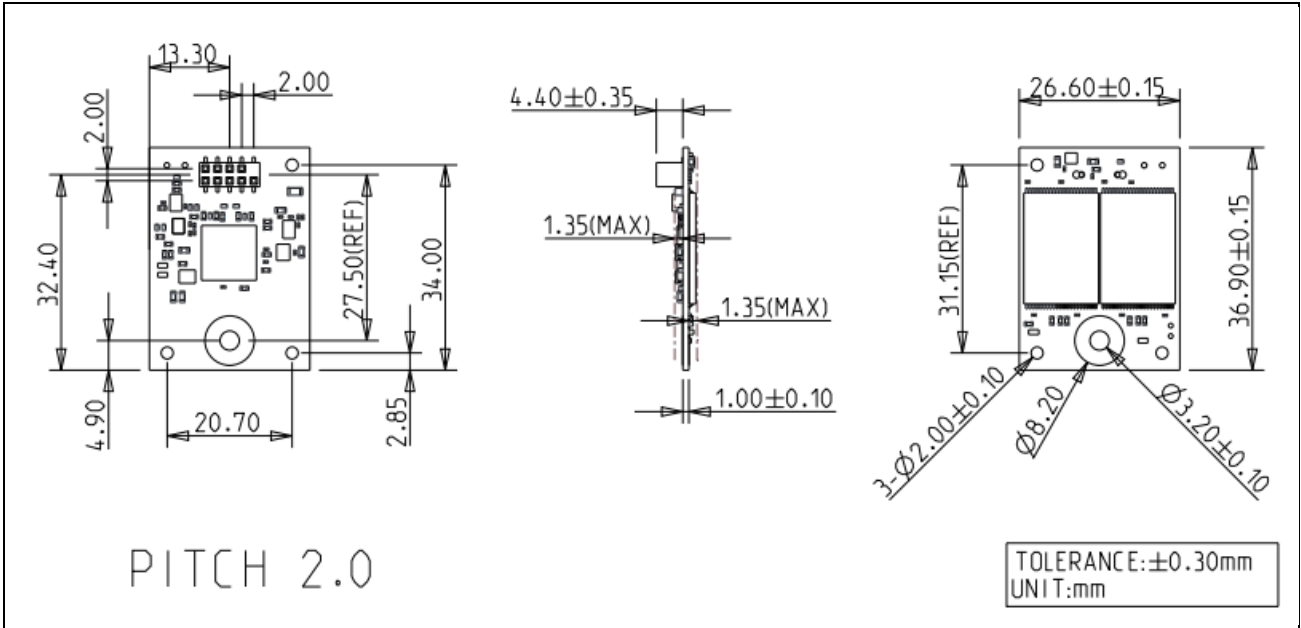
USB EDC Horizontal 2SE2 mechanical dimensions (Pin Pitch: 2.00mm)
